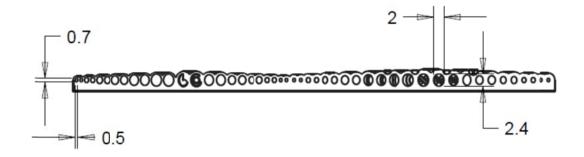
3D CAD drawing for test print (for the print see Fig. S2).
